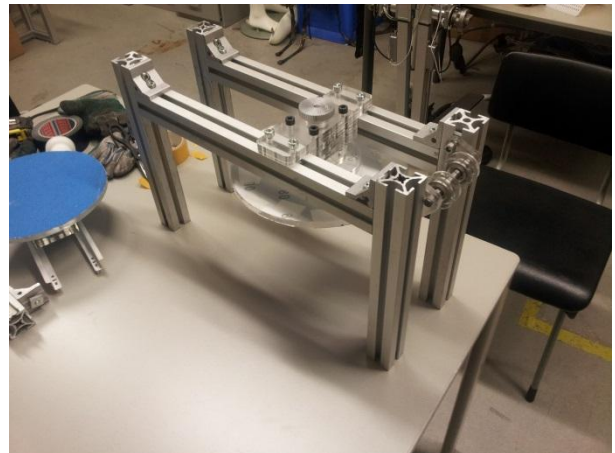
After the individual parts have been assembled the frame can be put together and the top disc attached to it
